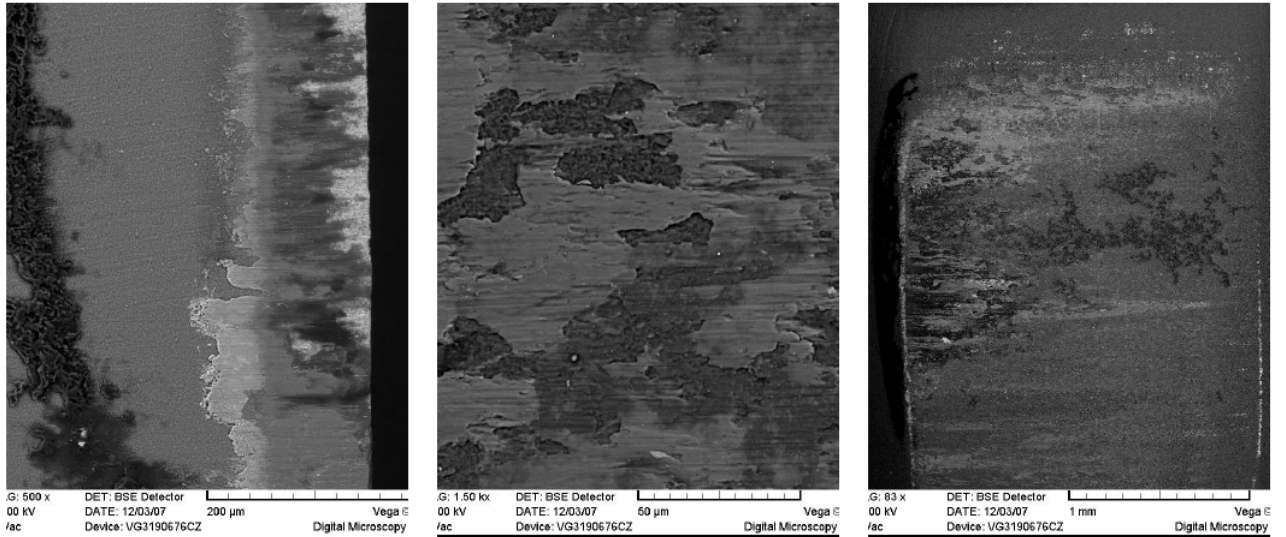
Calotte picture on MT3 with SHN2 coating MT3 cutting edge picture before coating, no sand blasting
